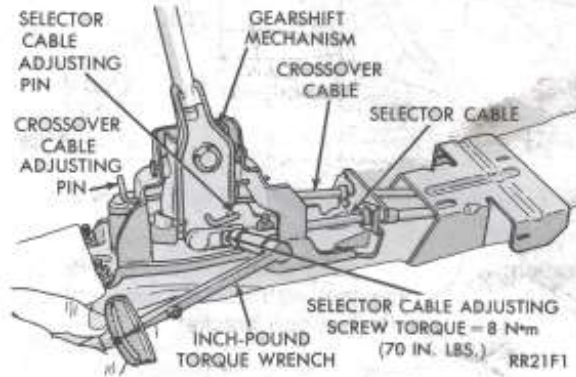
Adjusting Selector Cable (H,K,P-Bodies)
